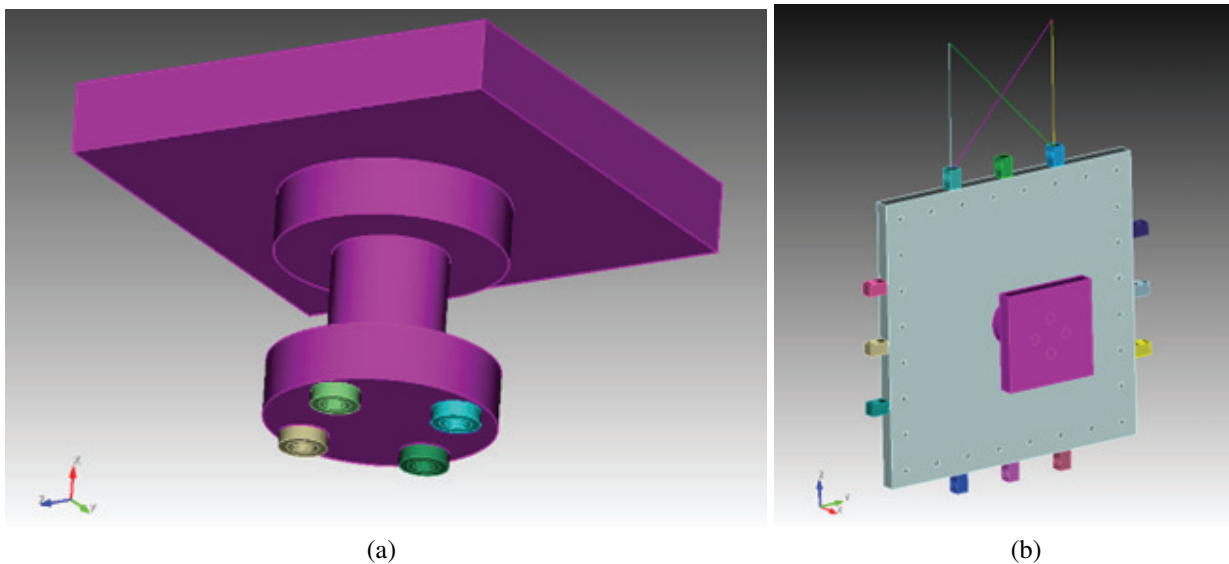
(a) Cantilever fixture with precision spacers and (b) cantilever fixture mounted in the center of the resonant plate.
